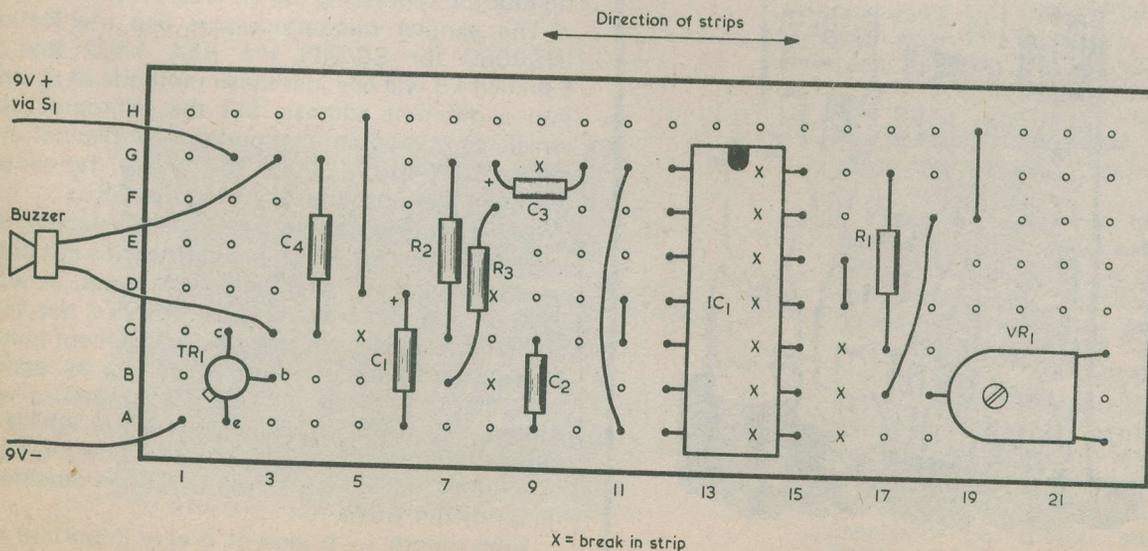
The component side of the Veroboard assembly employed in the prototype
